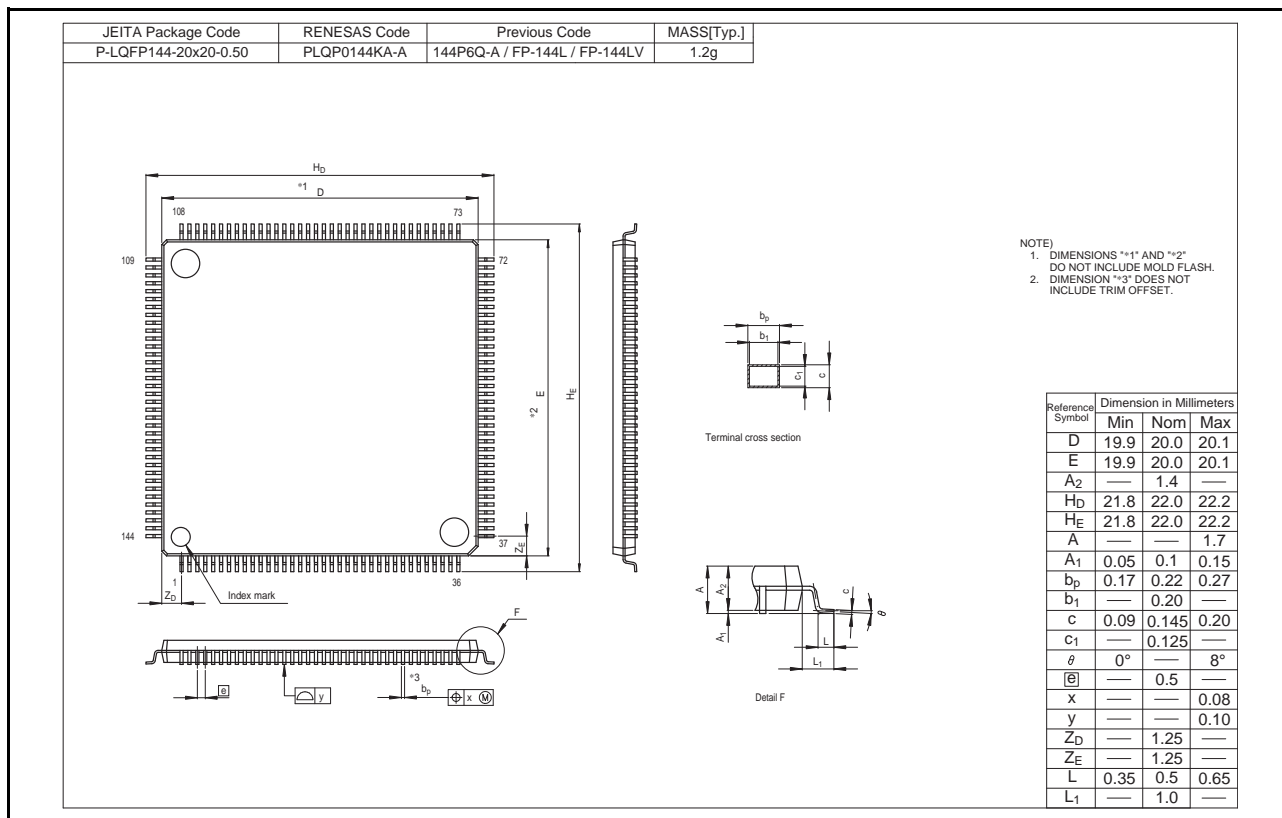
Pin LQFP (PLQP0144KA-A) Package Dimensions
